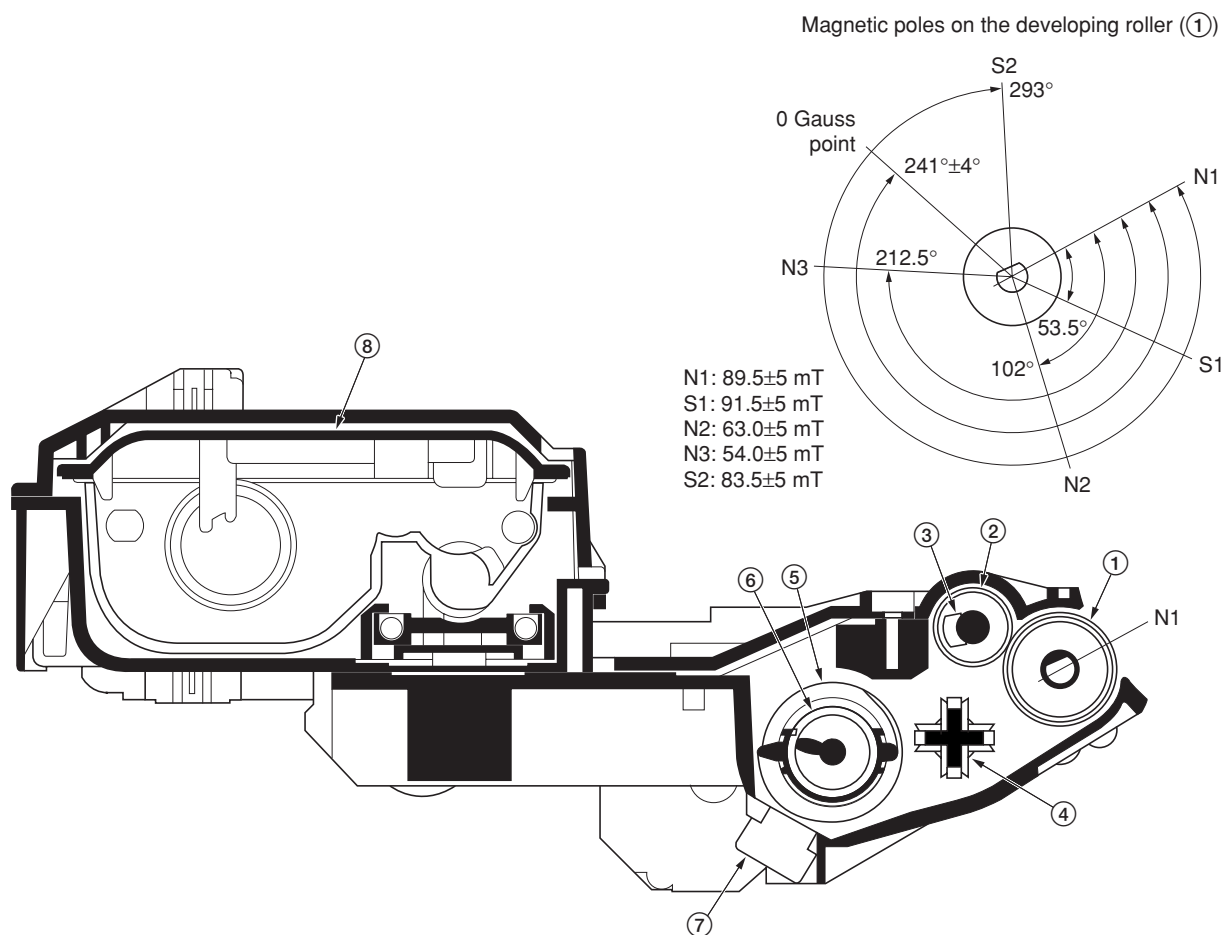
Cyan developer and magnetic poles on the developing roller
